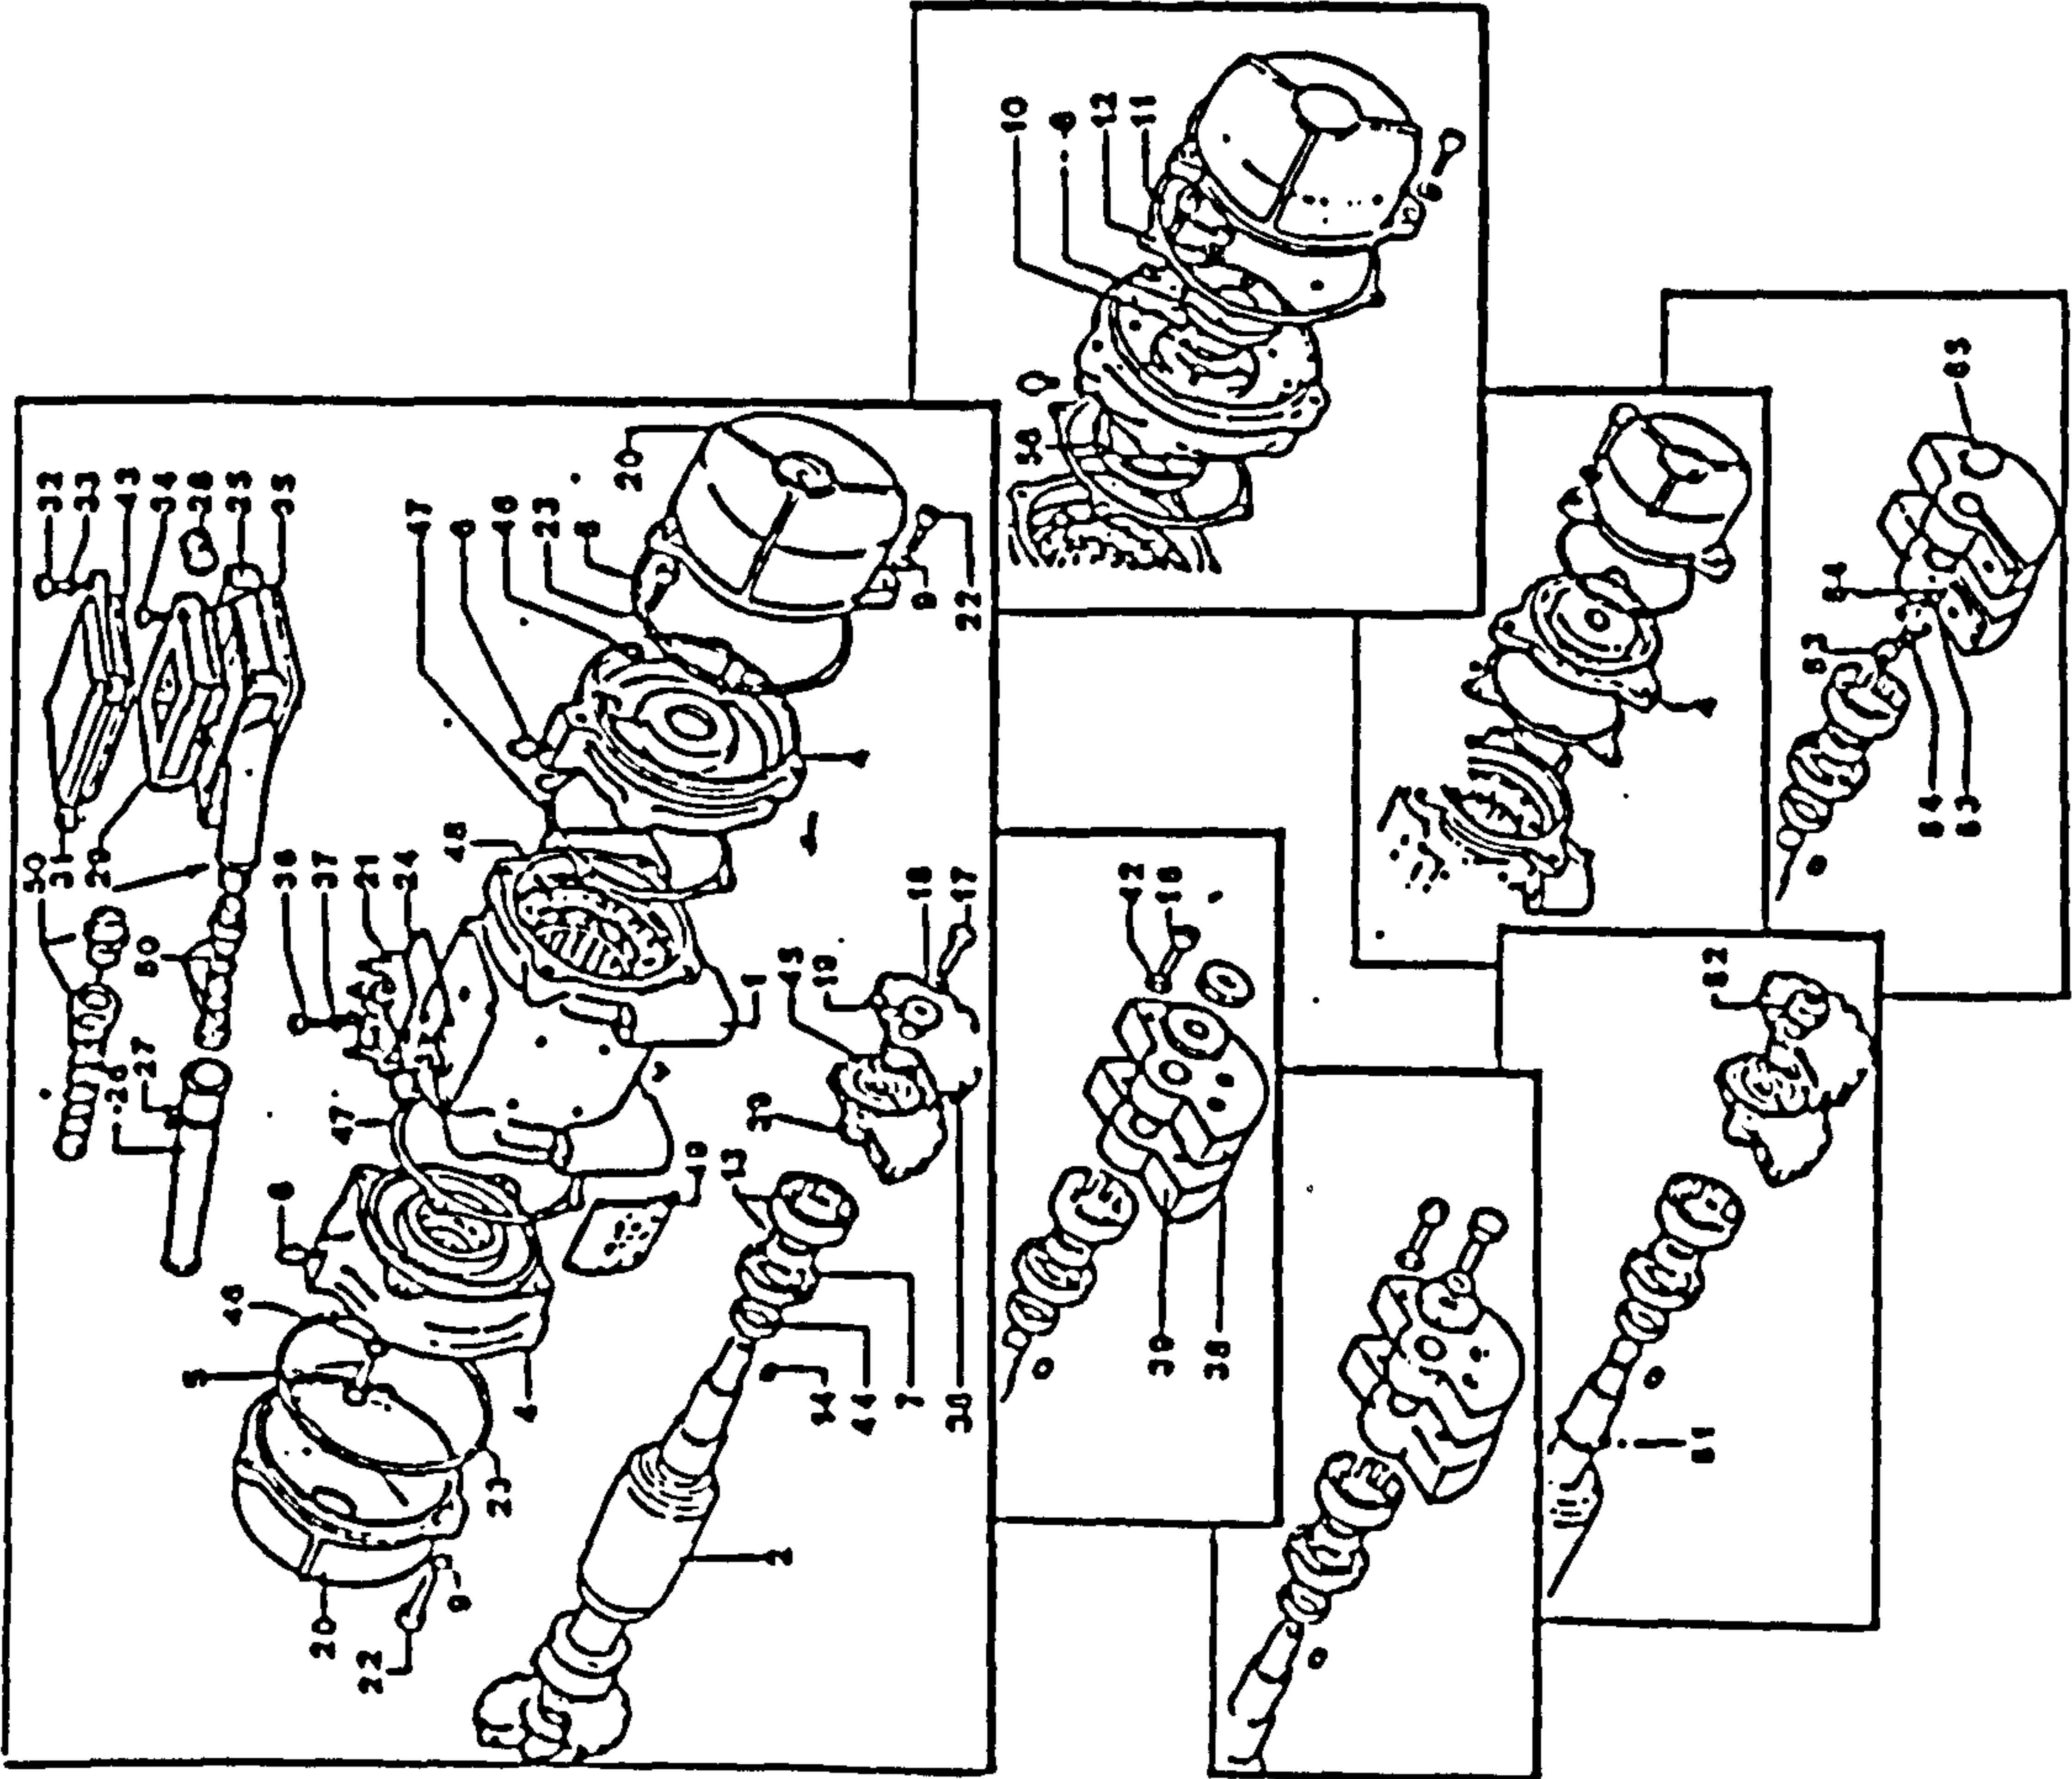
COMPONENT PARTS OF THE VIBRATOR.
